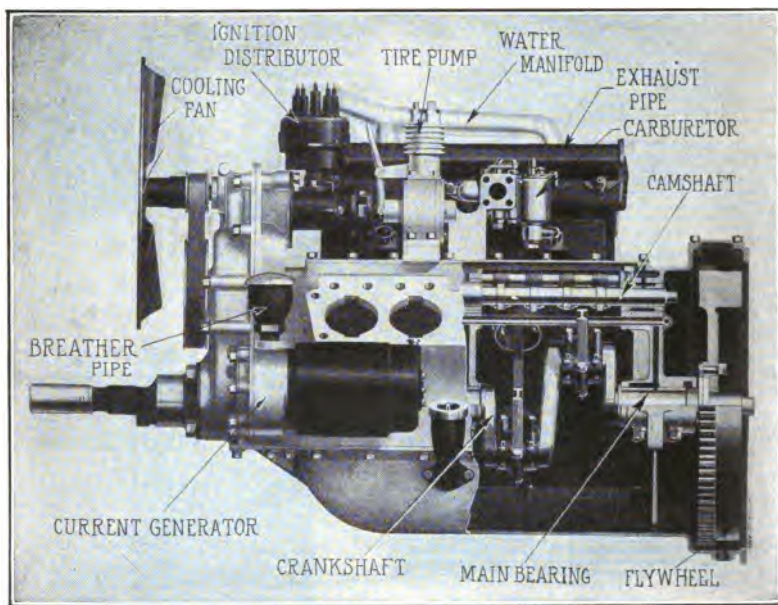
Side View of King Eight Cylinder Power Plant Showing Location of Current Generator and Ignition Distributor.
